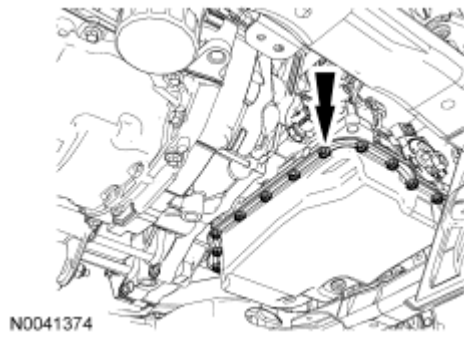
Identifying Transaxle Fluid Pan Bolts
